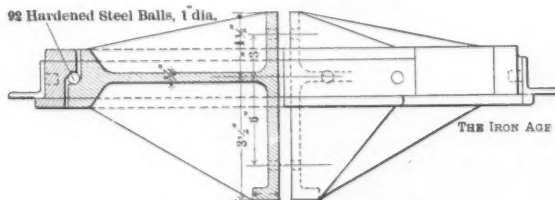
SECTION OF LOWER BALL BEARINGS.
